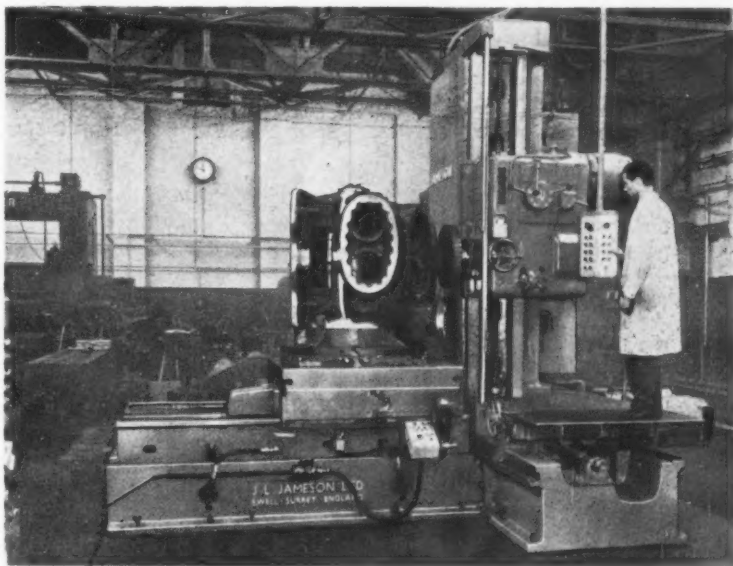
Jameson VA-Type Horizontal Travelling-column Milling and Boring Machine Shown Set-up for Face-milling a Compressor Crankcase
